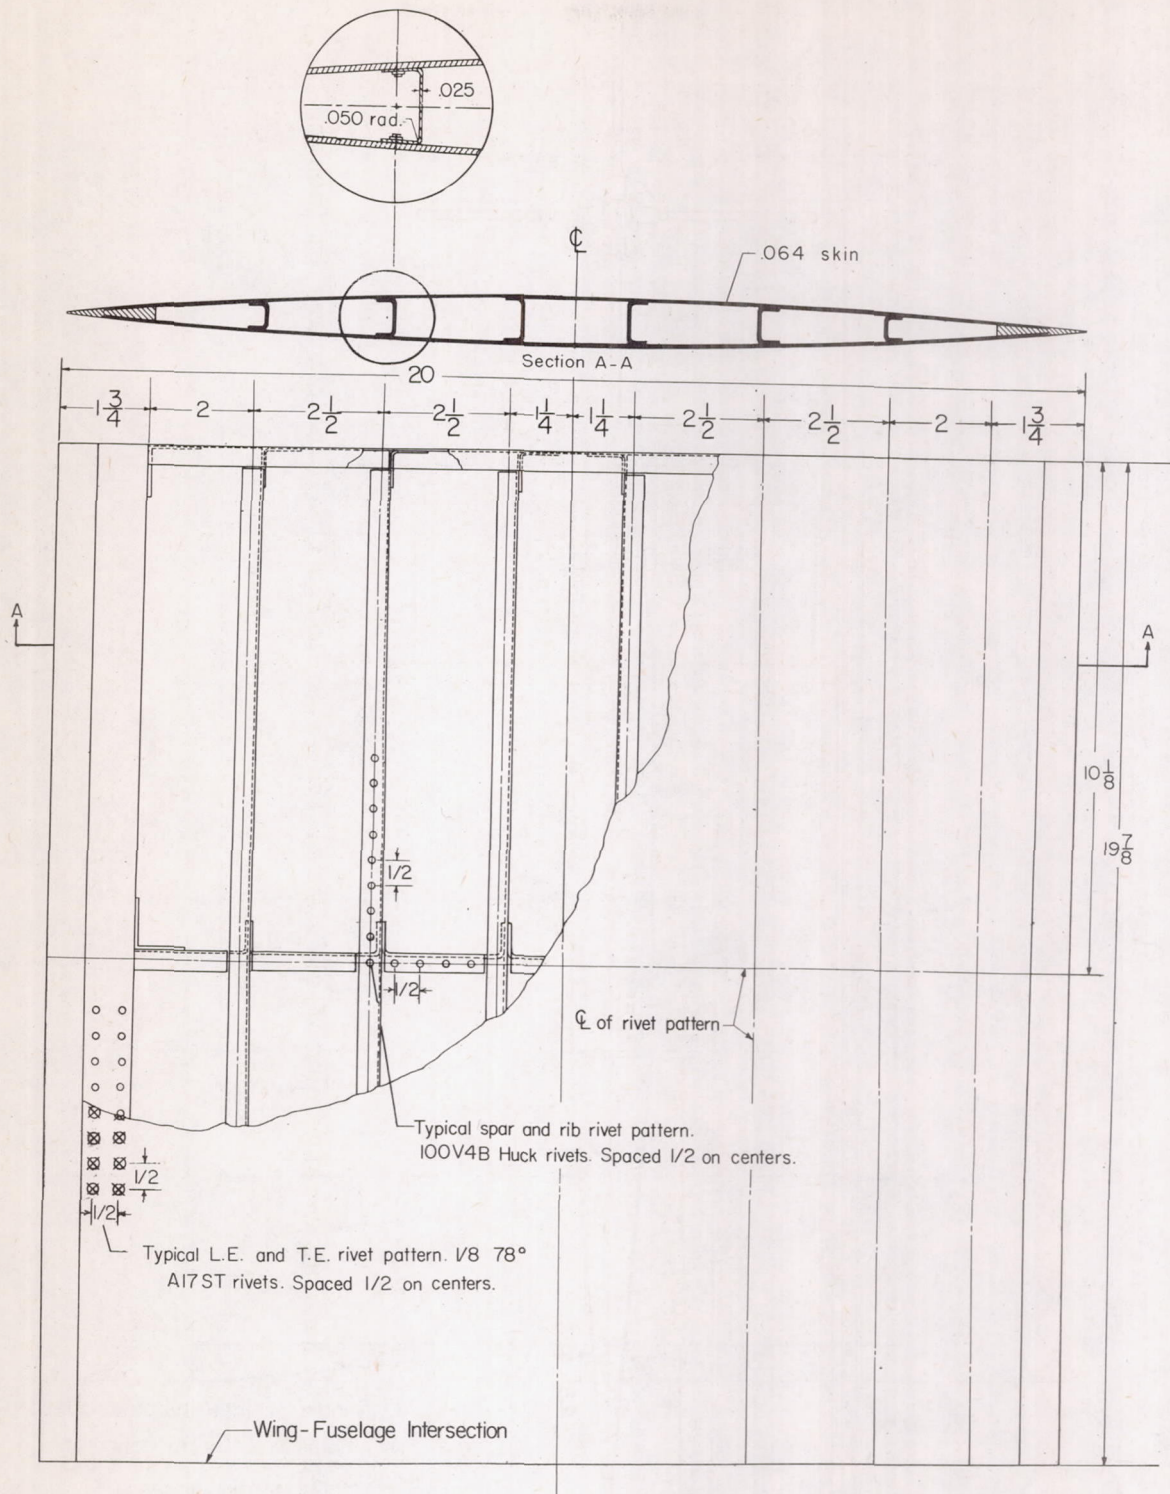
Dimensions of test wing. All dimensions are in inches.
